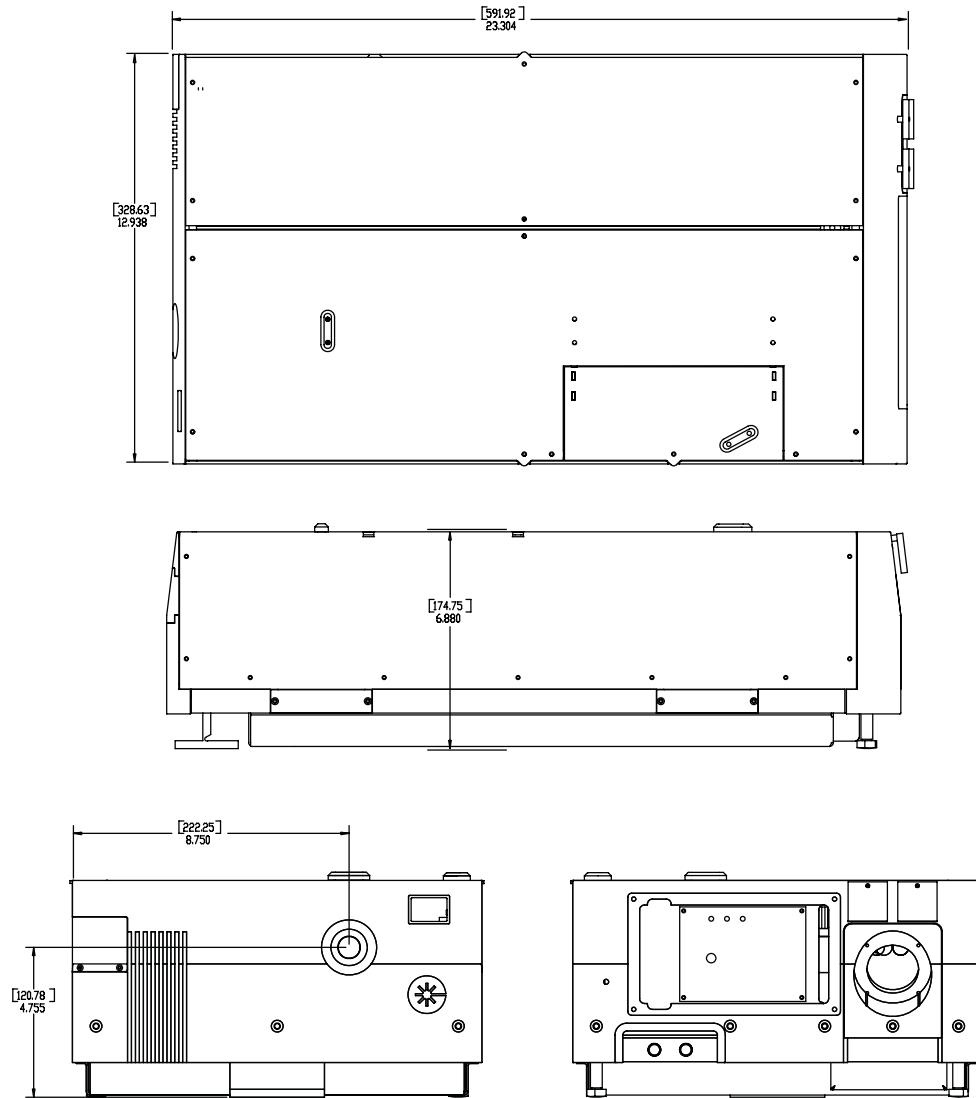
Laser Head Dimensions. Values are Listed in [Millimeters] and Inches.
